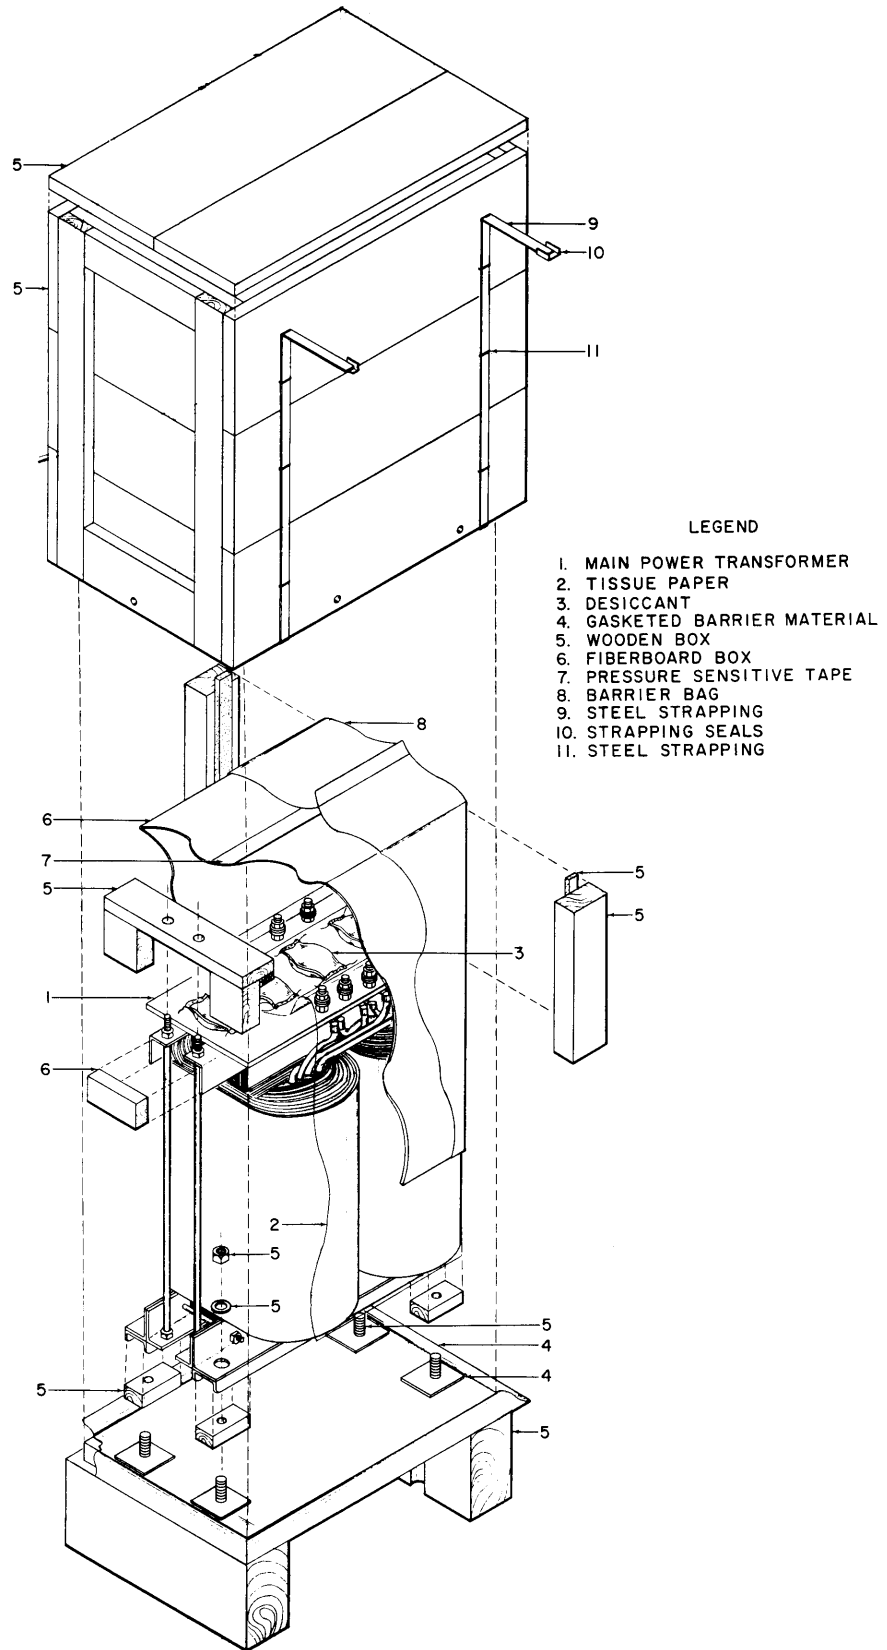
Typical Equipment Packaging (sheet 5 of 5)
